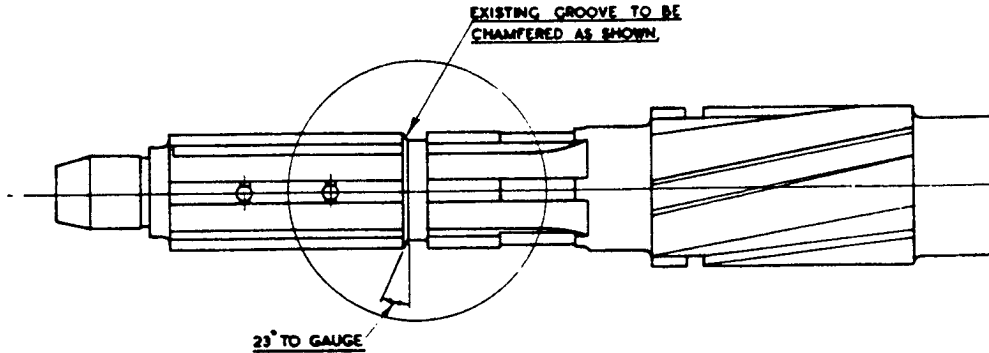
TO MODIFY THE THIRD MOTION SHAFT
